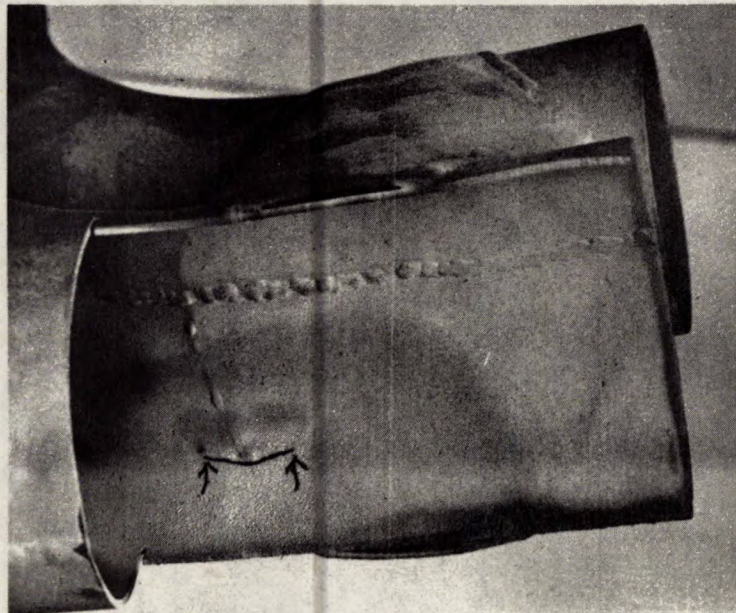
Sample B, showing inner surface of Y-tube at weld with connecting tube, after sand blasting and penetrant inspection. Approx. 2/3 size.
